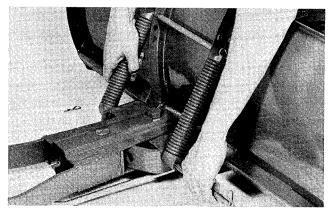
Attach Trip Springs to Sector and Channel Assembly
